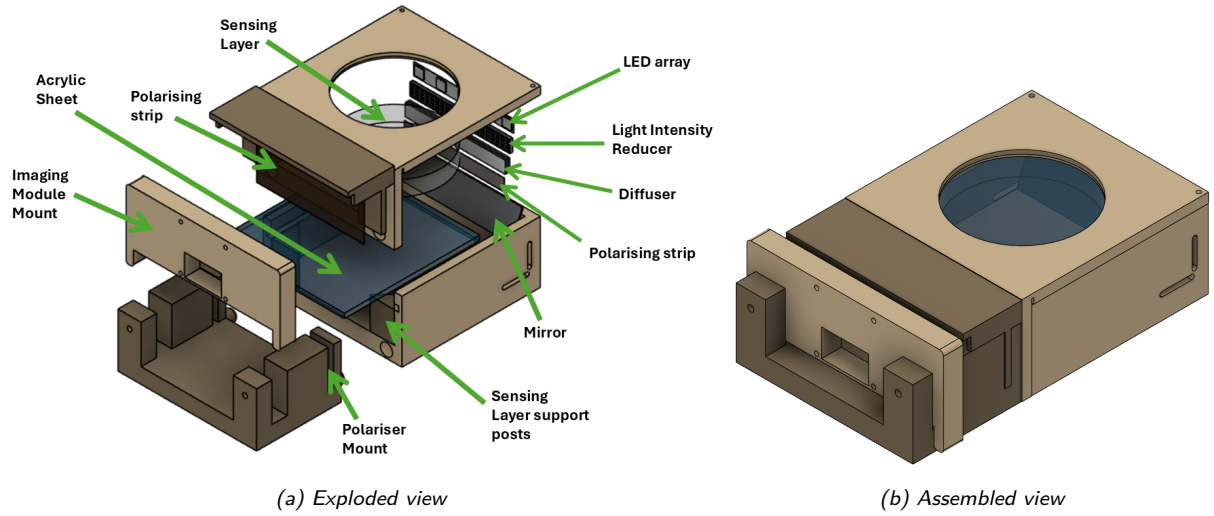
Final prototype: (a) exploded view showing the discrete illumination, polarisation, and mounting components; (b) assembled view.
